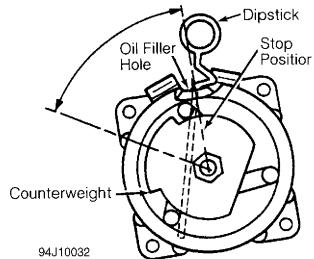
Checking Jaguar XJS Compressor Oil Level (Sanden 7-Cylinder) Courtesy of Jaguar Cars, Inc.
